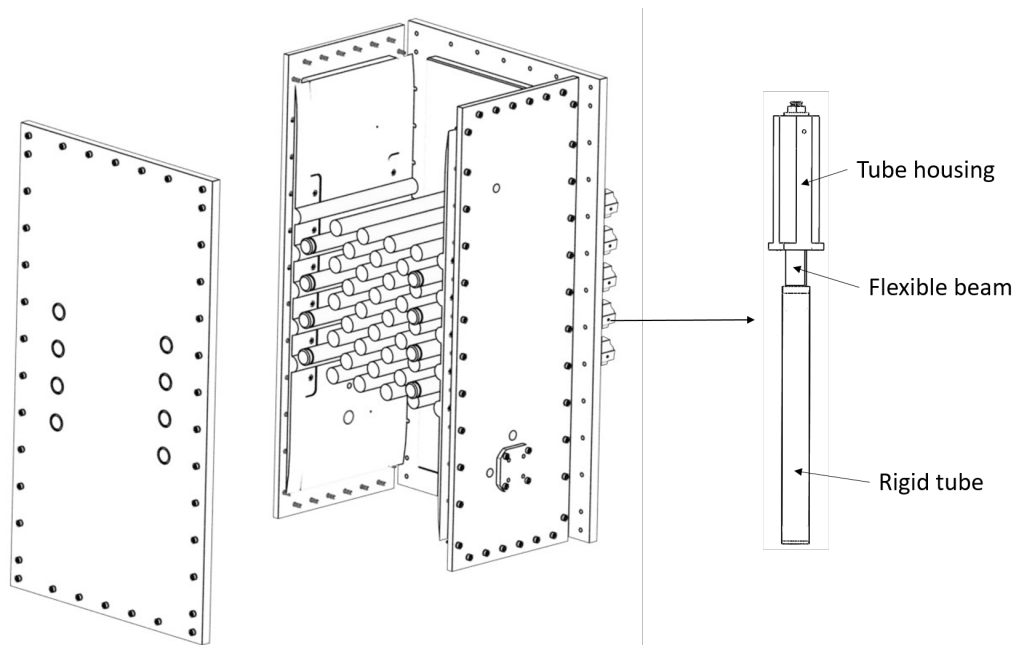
Test section showing tube bundle and flexible tube structure.
